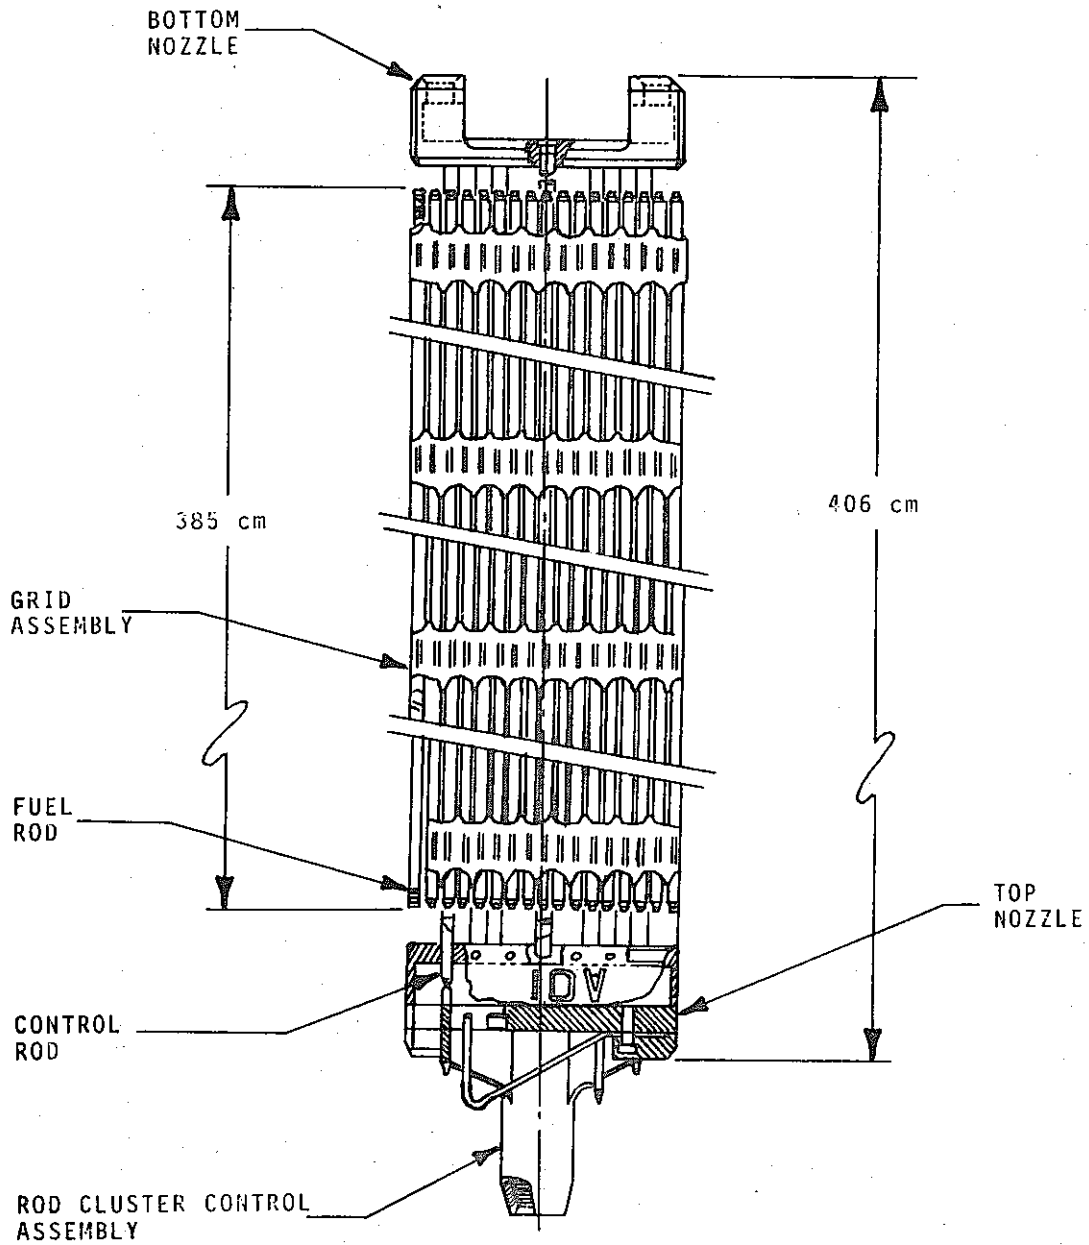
PWR Fuel Assembly⁽⁵⁾
